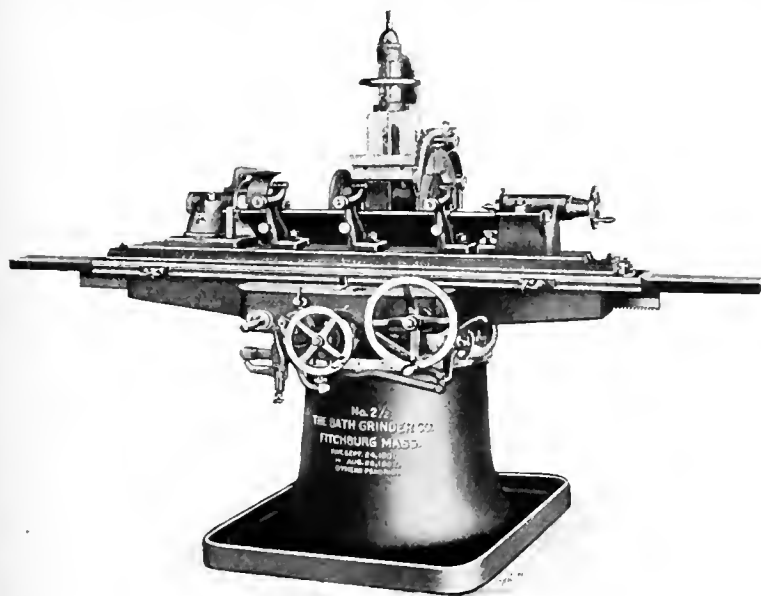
The Improved No. 21-2 Bath Universal Grinder.
